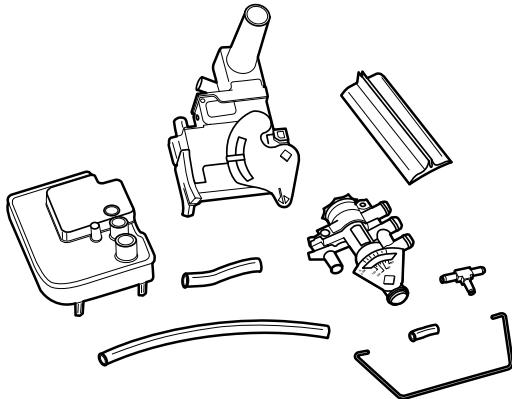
Components Selected From Universal Control Package for Installation on 37HS4
